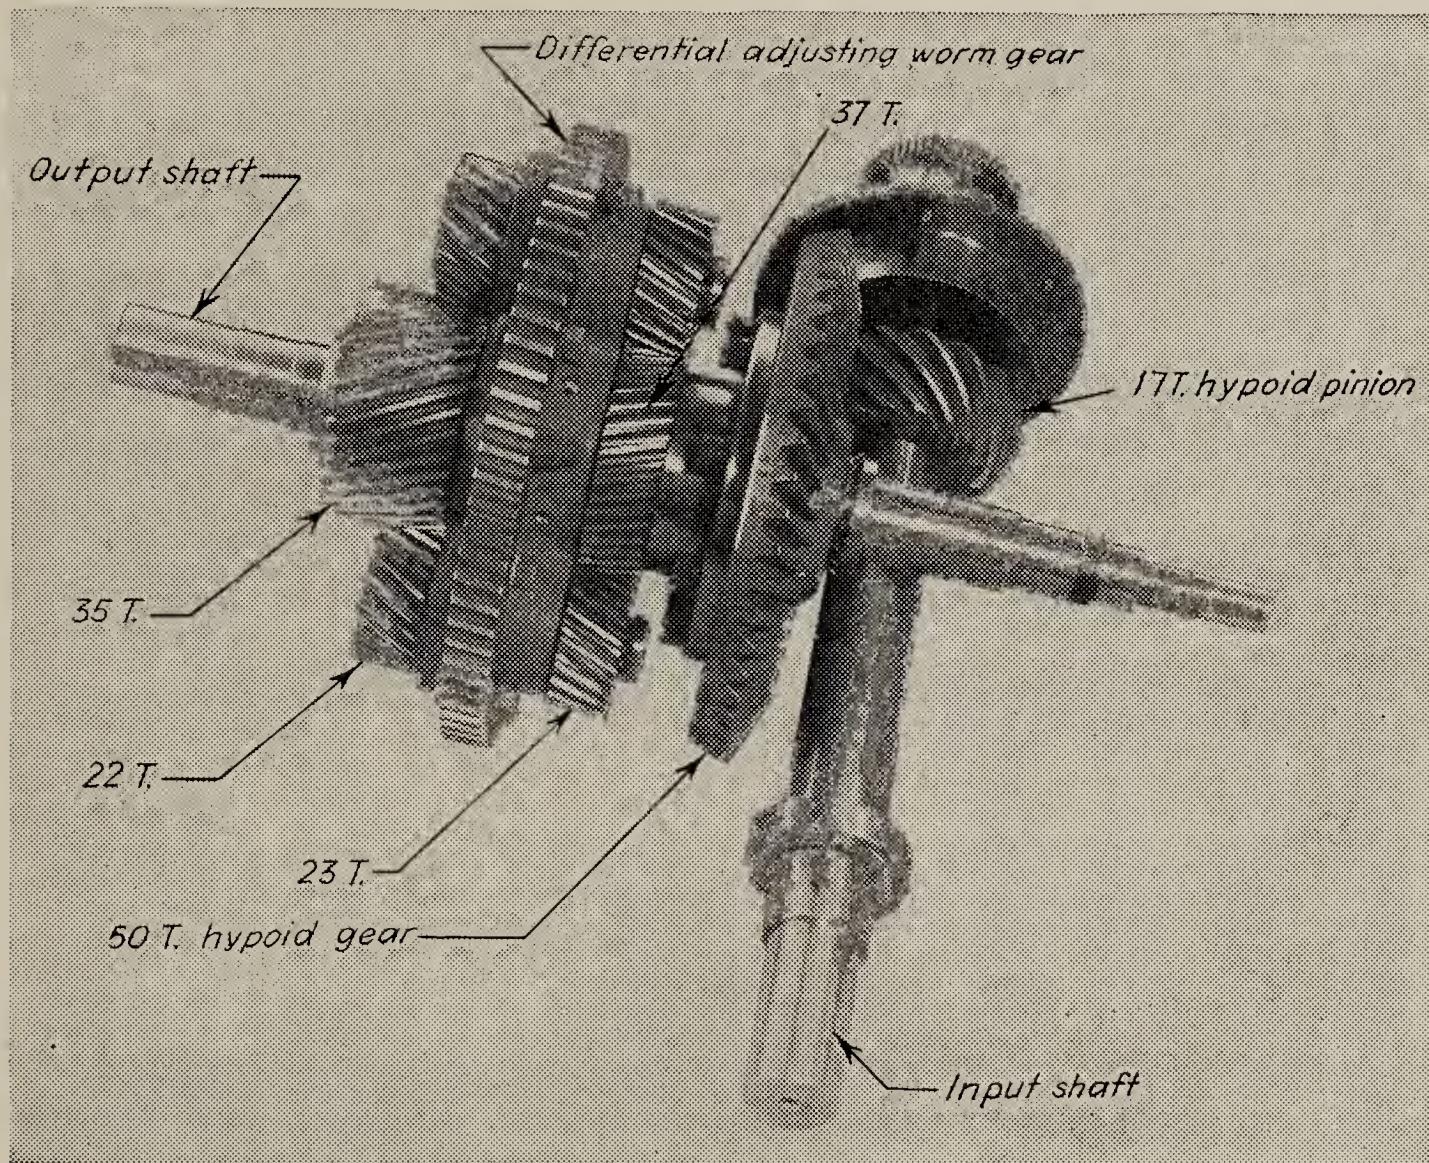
Differential gear drive for Gravure press. (Courtesy of Kidder Press Company.)
